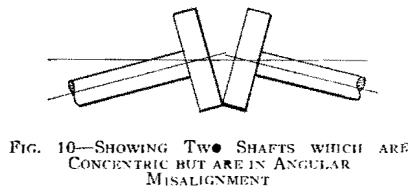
SHOWING TWO SHAFTS WHICH ARE CONCENTRIC BUT ARE IN ANGULAR MISALIGNMENT
